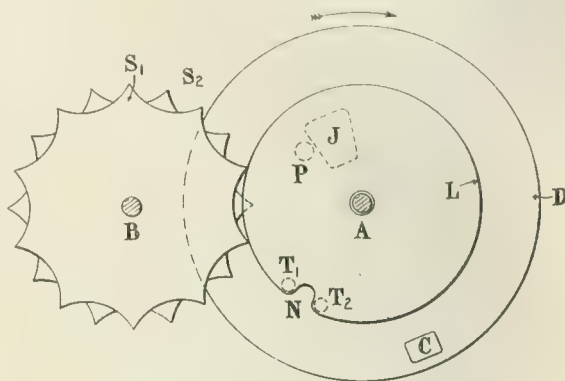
Scallop-wheel Counter Gear and Jump Device.
